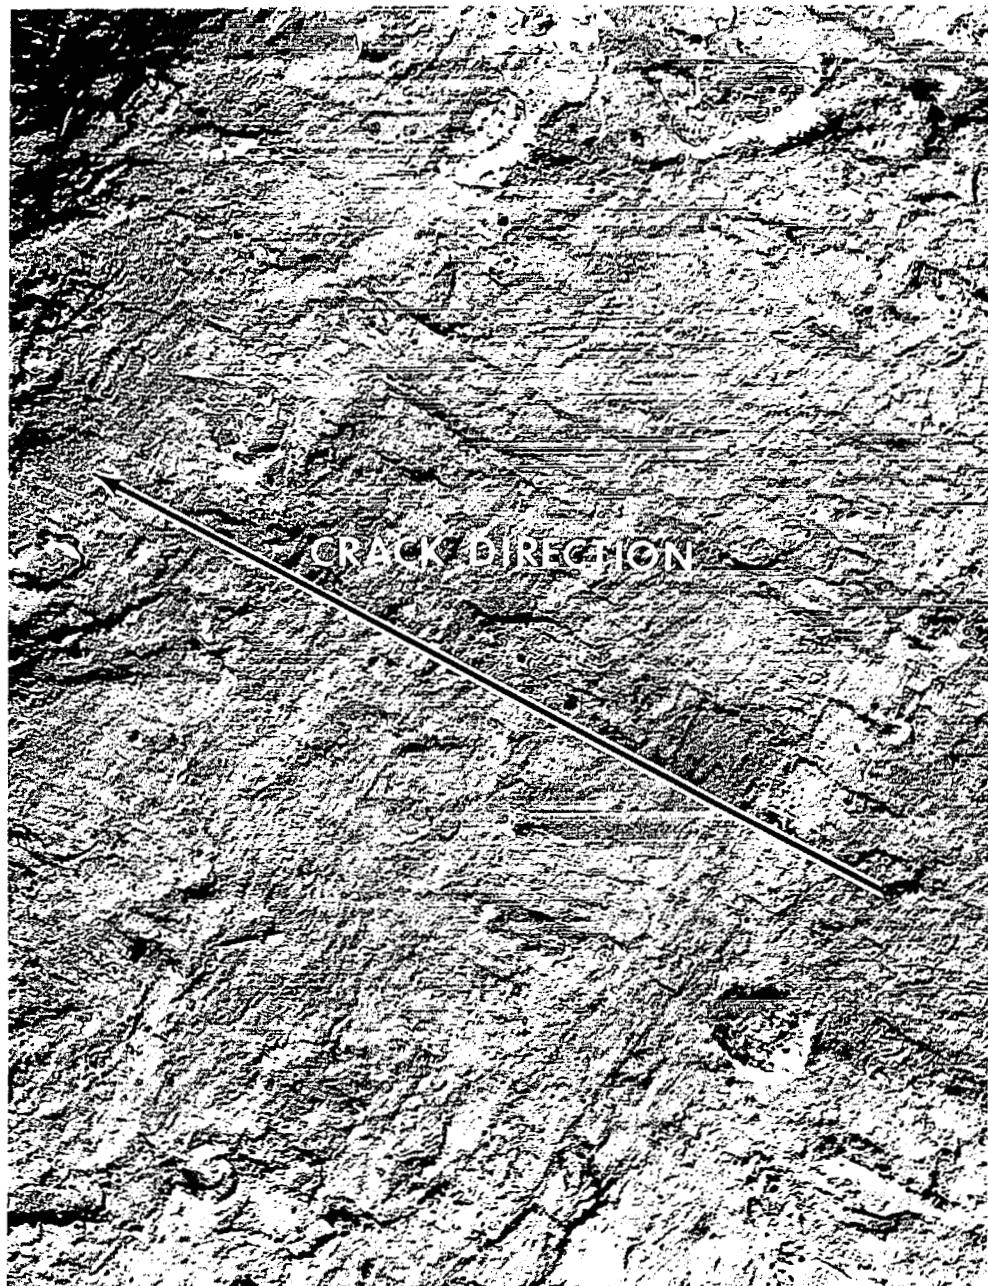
Example of Vague Fatigue Striations Found Between Rubbed Areas of Fracture Surface "A" (Arrow Indicates Crack Direction) X12,000
